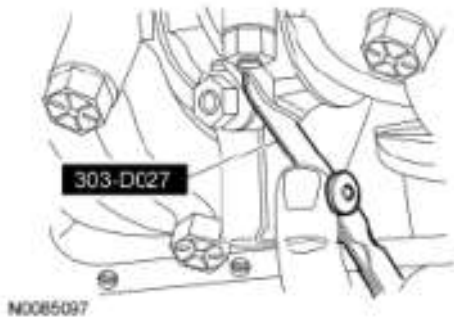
Measuring Clearance Between Connecting Rod And Crankshaft
